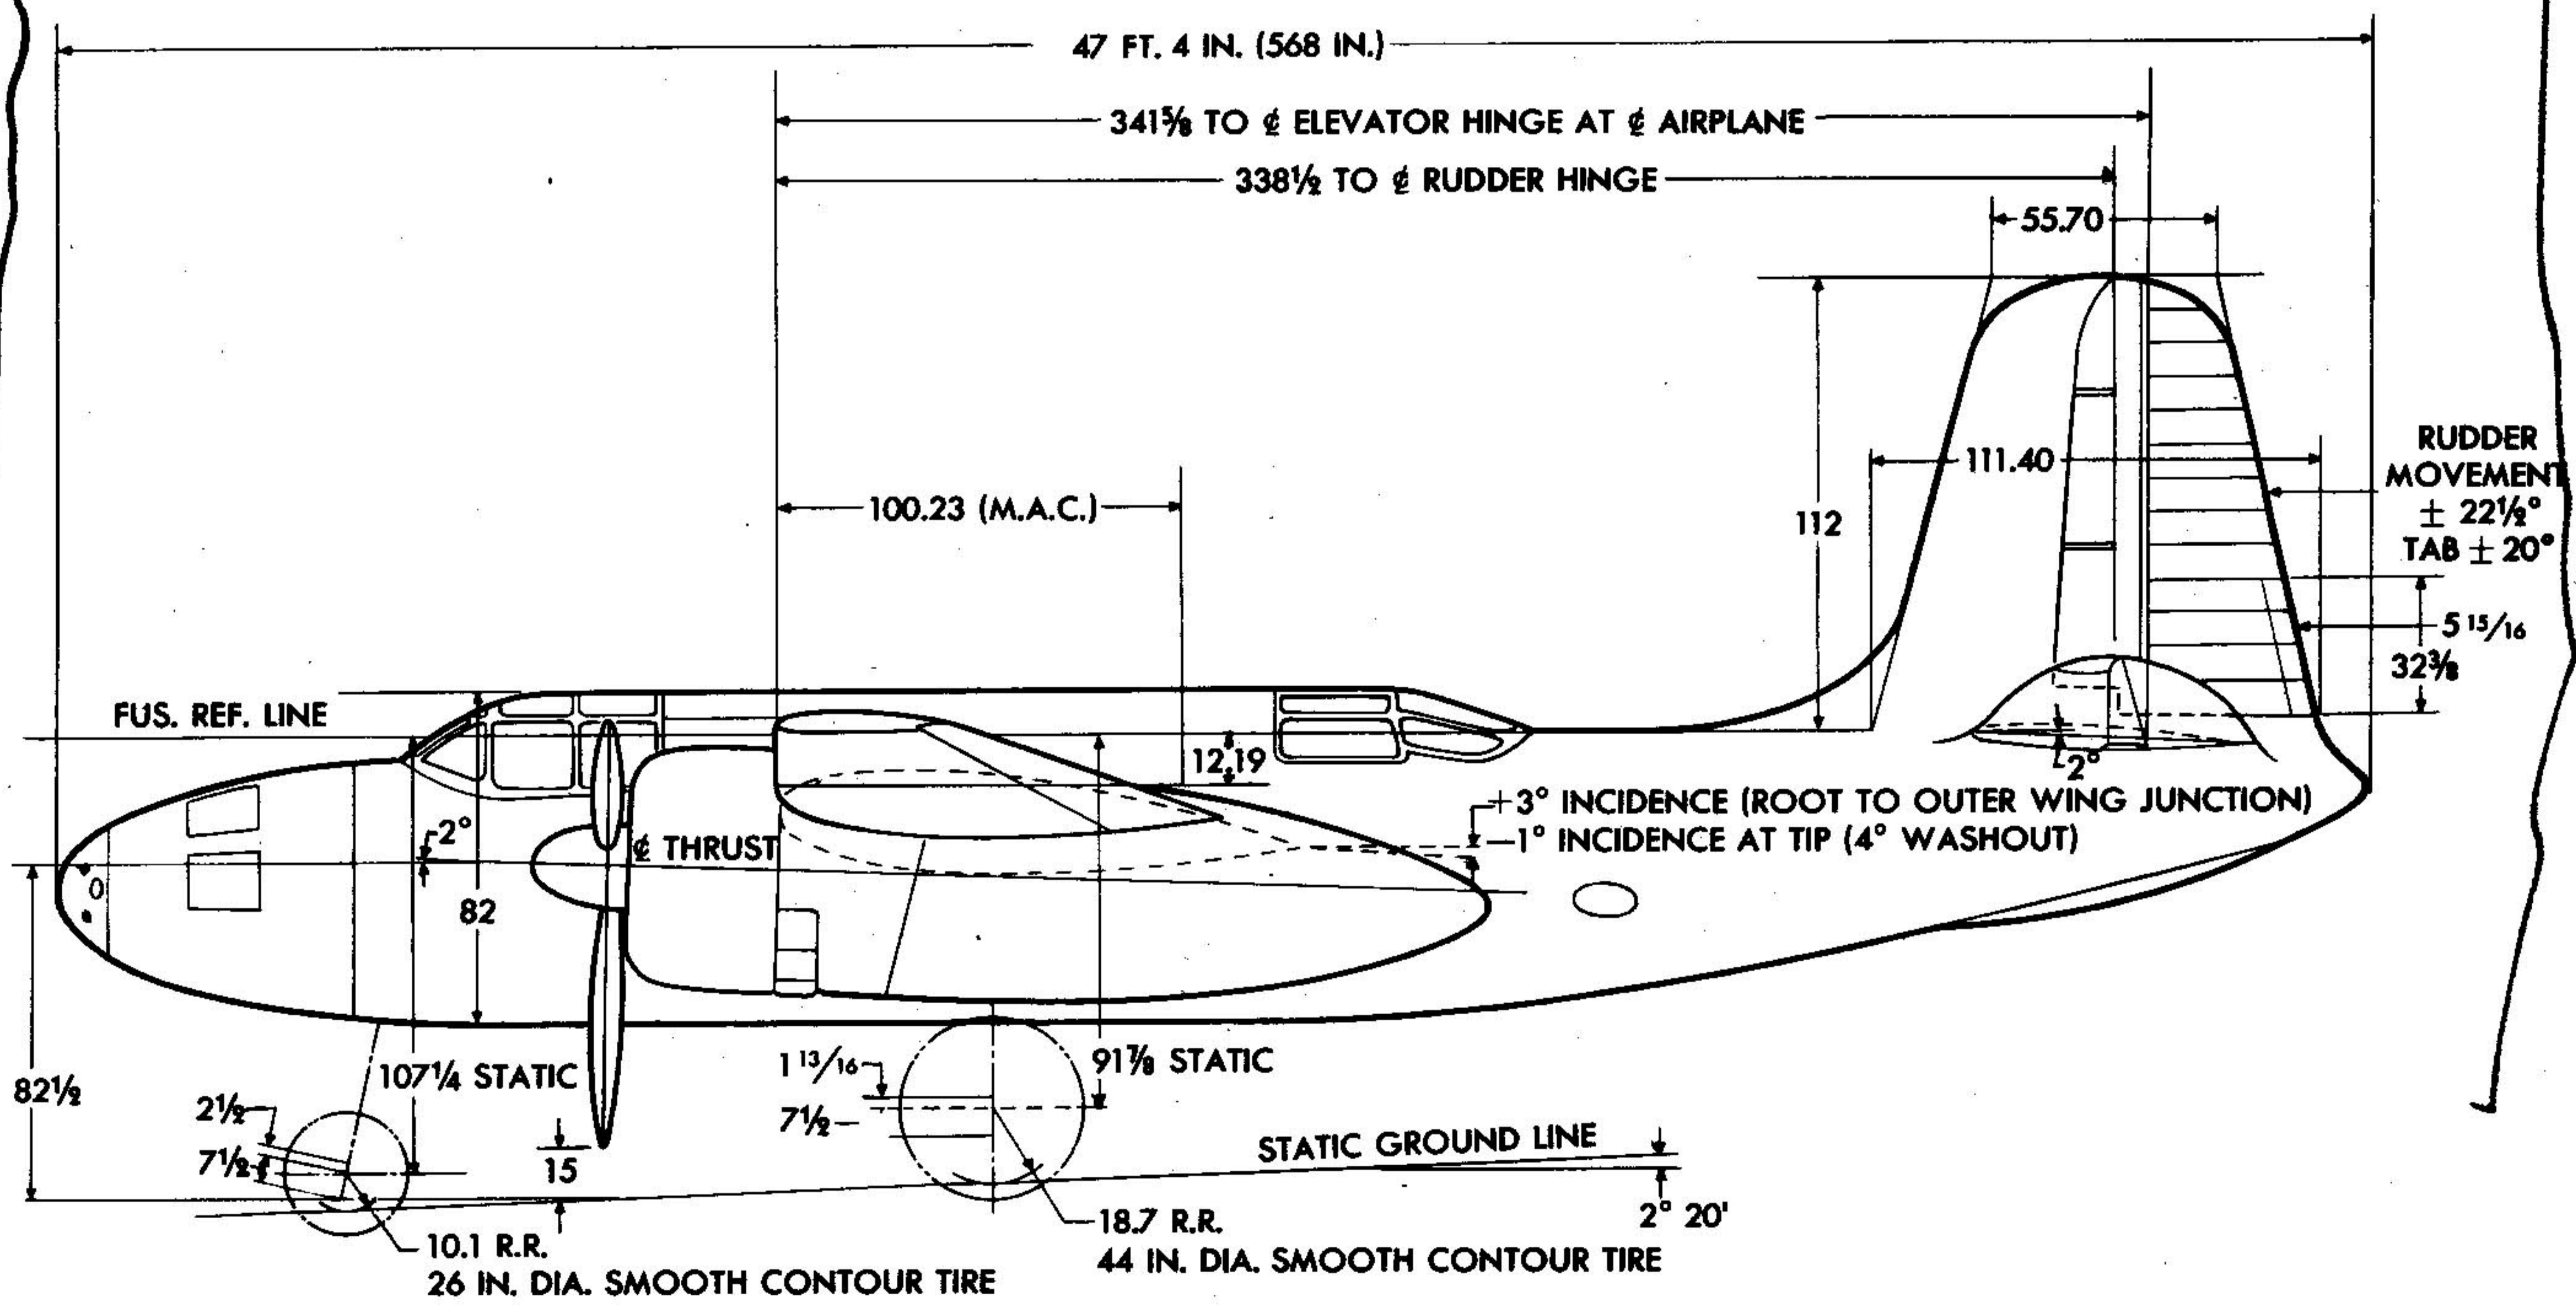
SIDE VIEW, SHOWING PRINCIPAL DIMENSIONS
